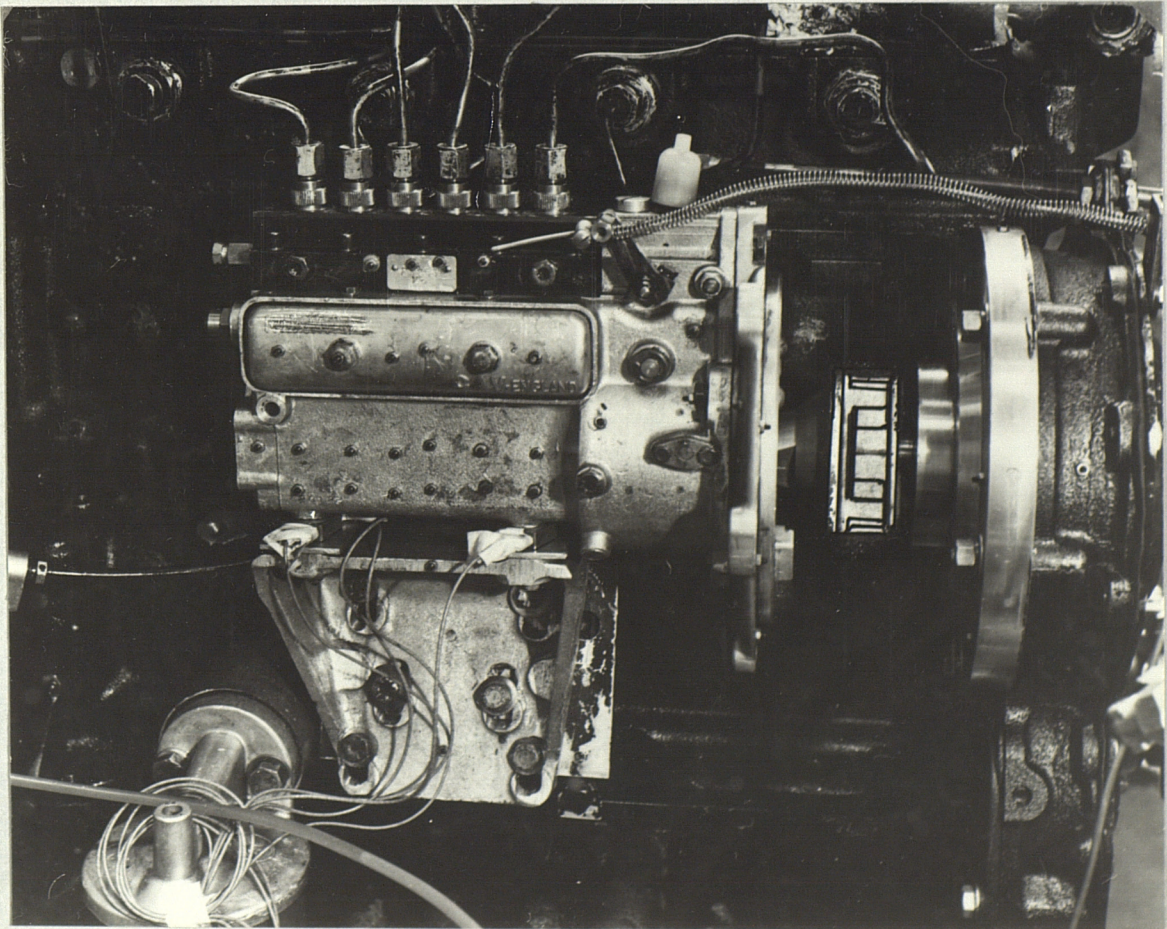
BASE MOUNTED PUMP ASSEMBLY.
